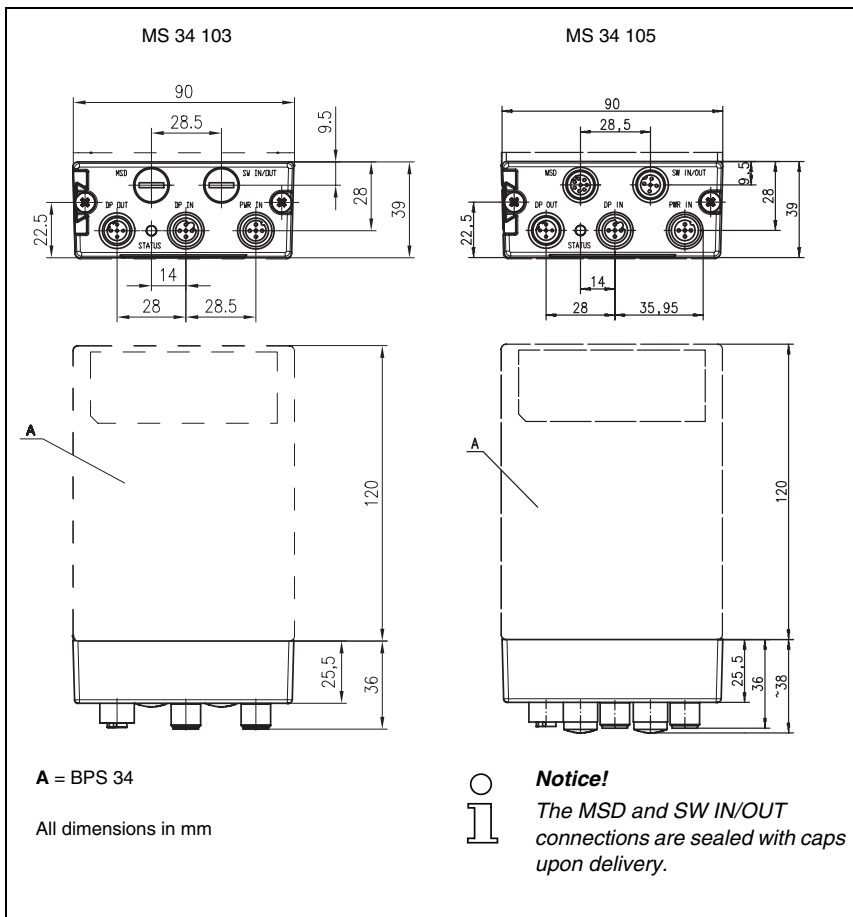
Dimensioned drawing MS 34 103 / MS 34 105
